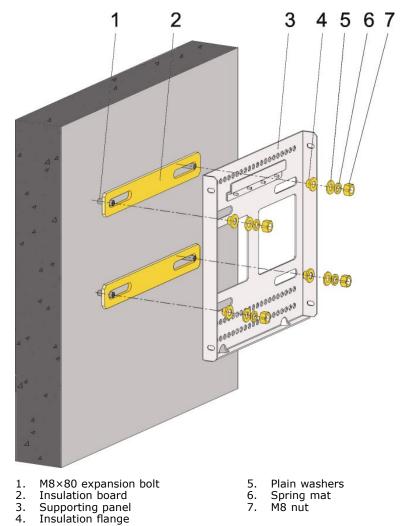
INSTALLING SUPPORTING PANEL ON WALL
